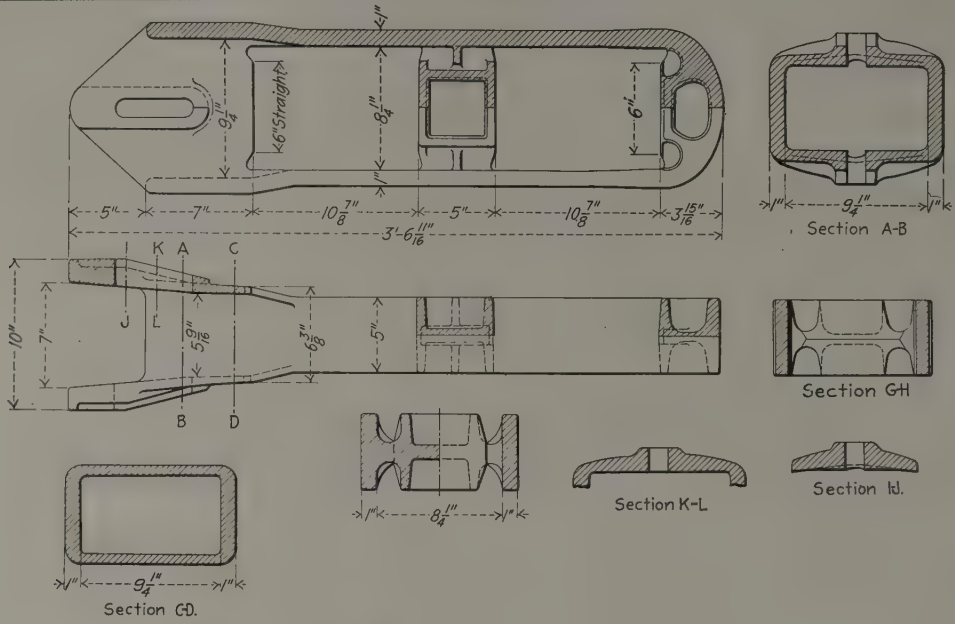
Buckeye Yoke for 8 in. by 8 in. Tandem Gear.
